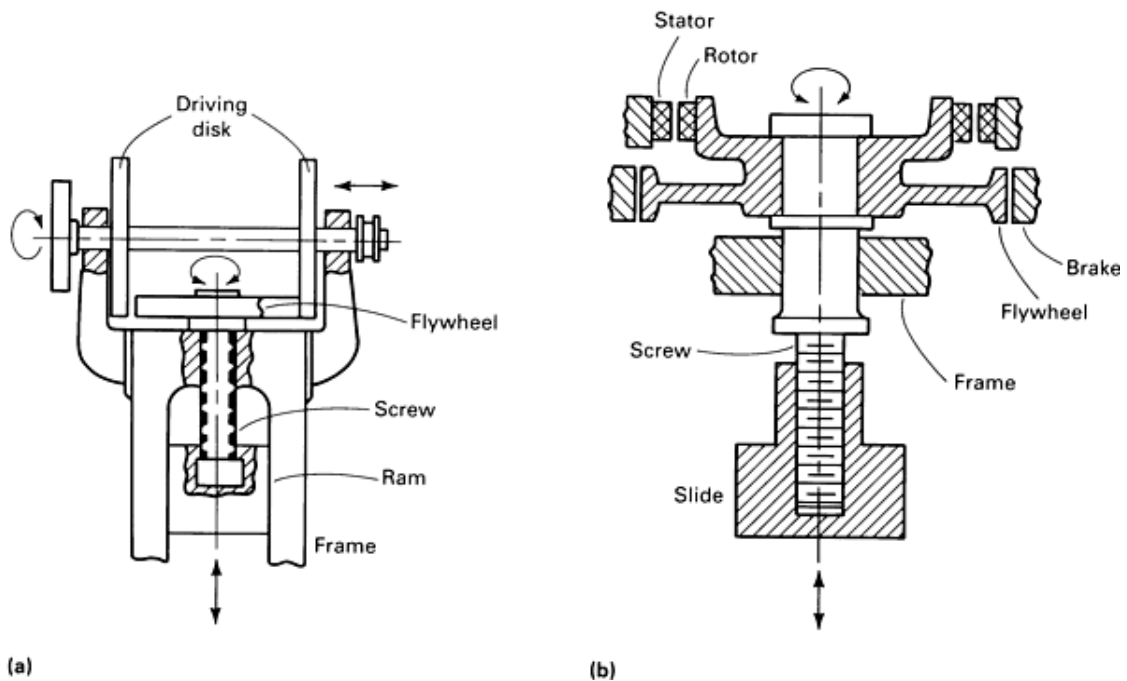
Two common types of screw press drives. (a) Friction drive. (b) Direct electric drive
